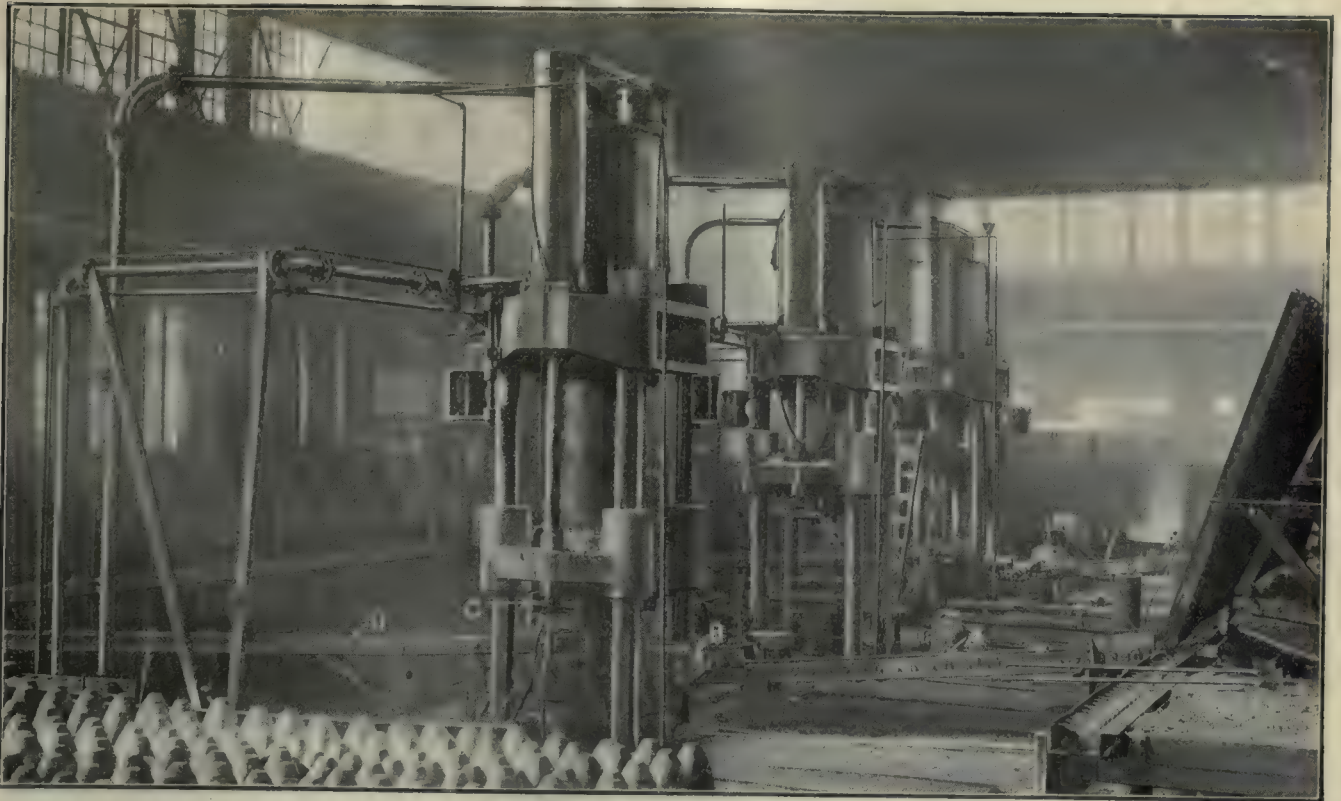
GENERAL VIEW OF HYDRAULIC SHELL-FORGING PRESSES AND EQUIPMENT
